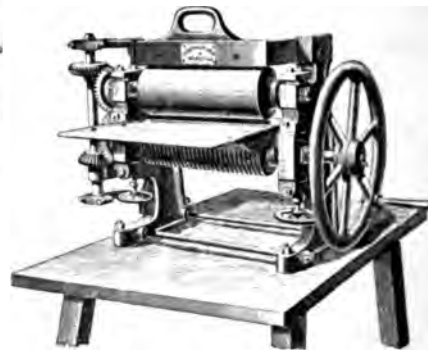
Cutting Machine for Quarries. Fig. 610.—Polishing Machine for Quarries.
